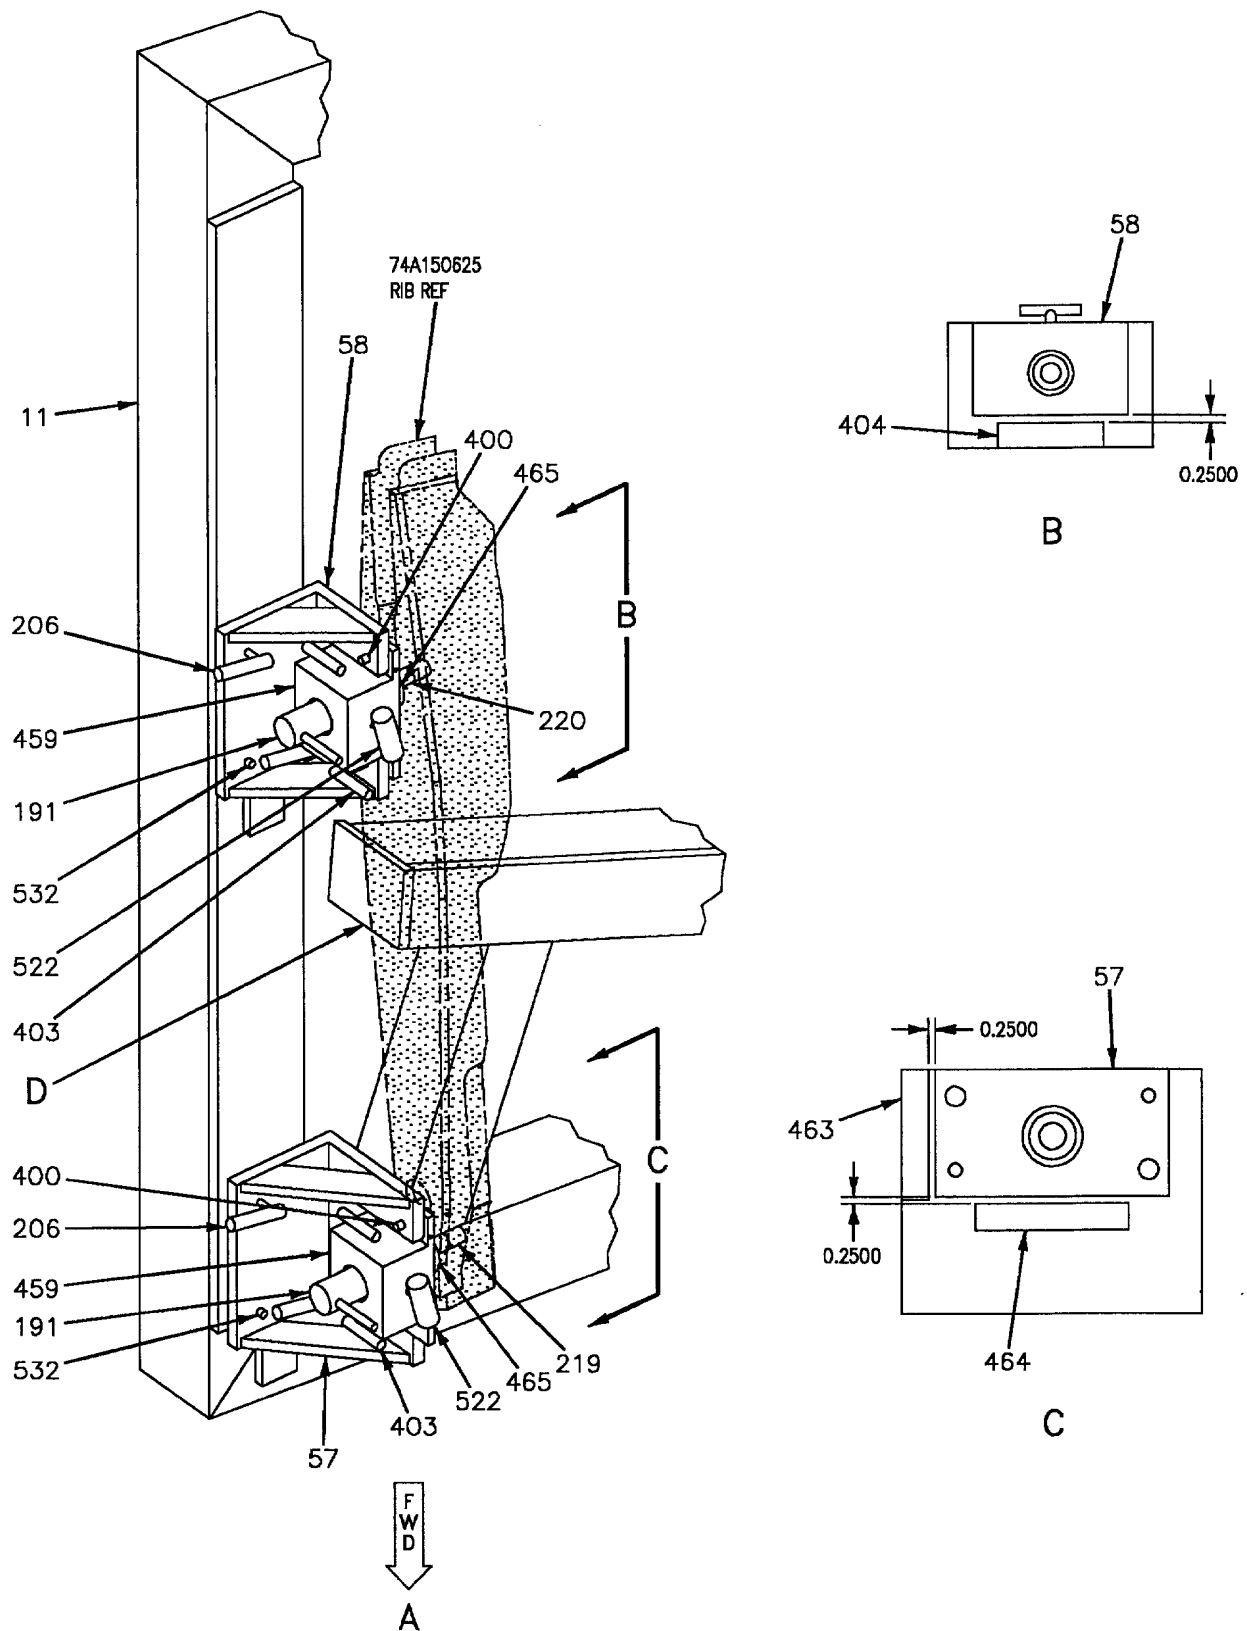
Missile Support Ribs, 74A150625 (Sheet 1)
